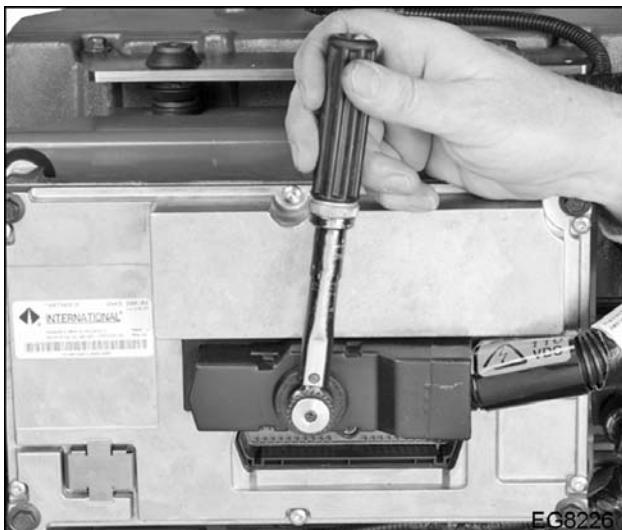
Torque ECM connector cover retaining screws (front mount ECM)
